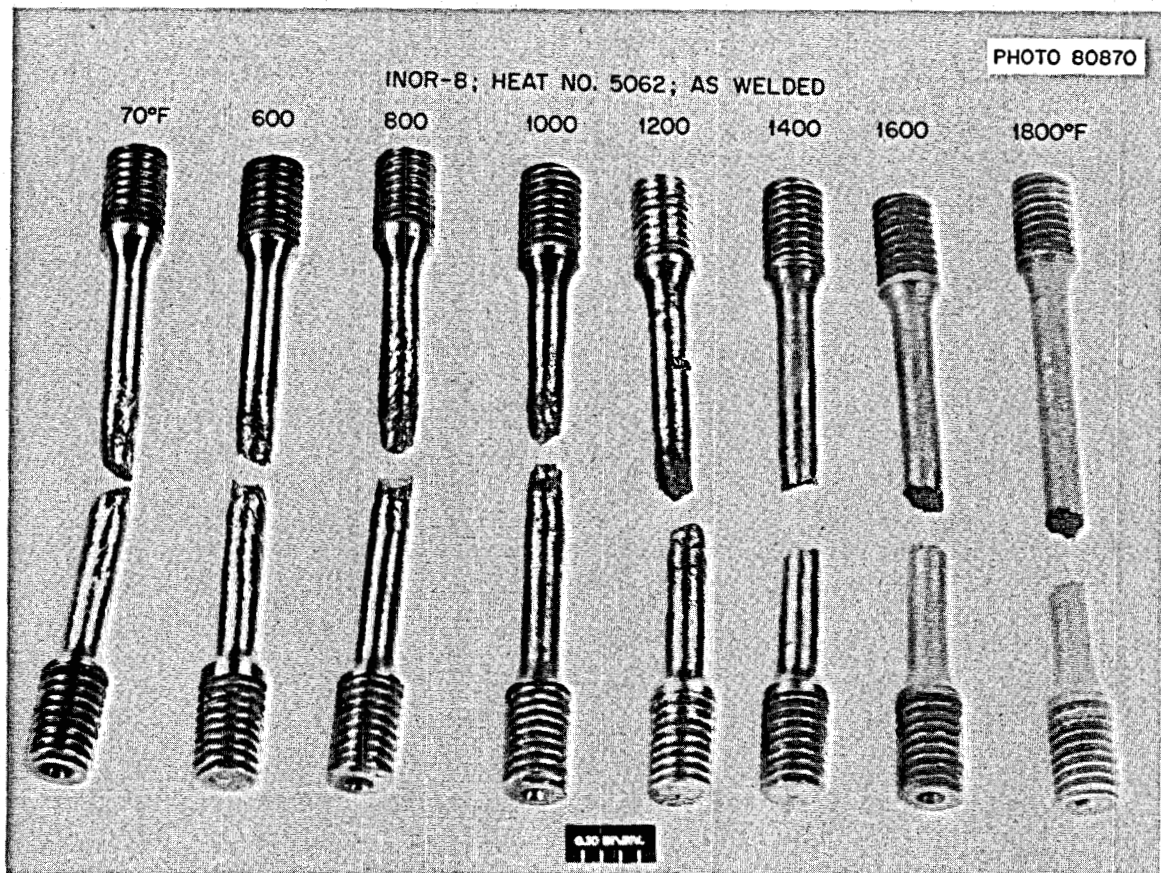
Tensile tests in INOR-8 heat 5062 (as welded) showing location of fracture.
